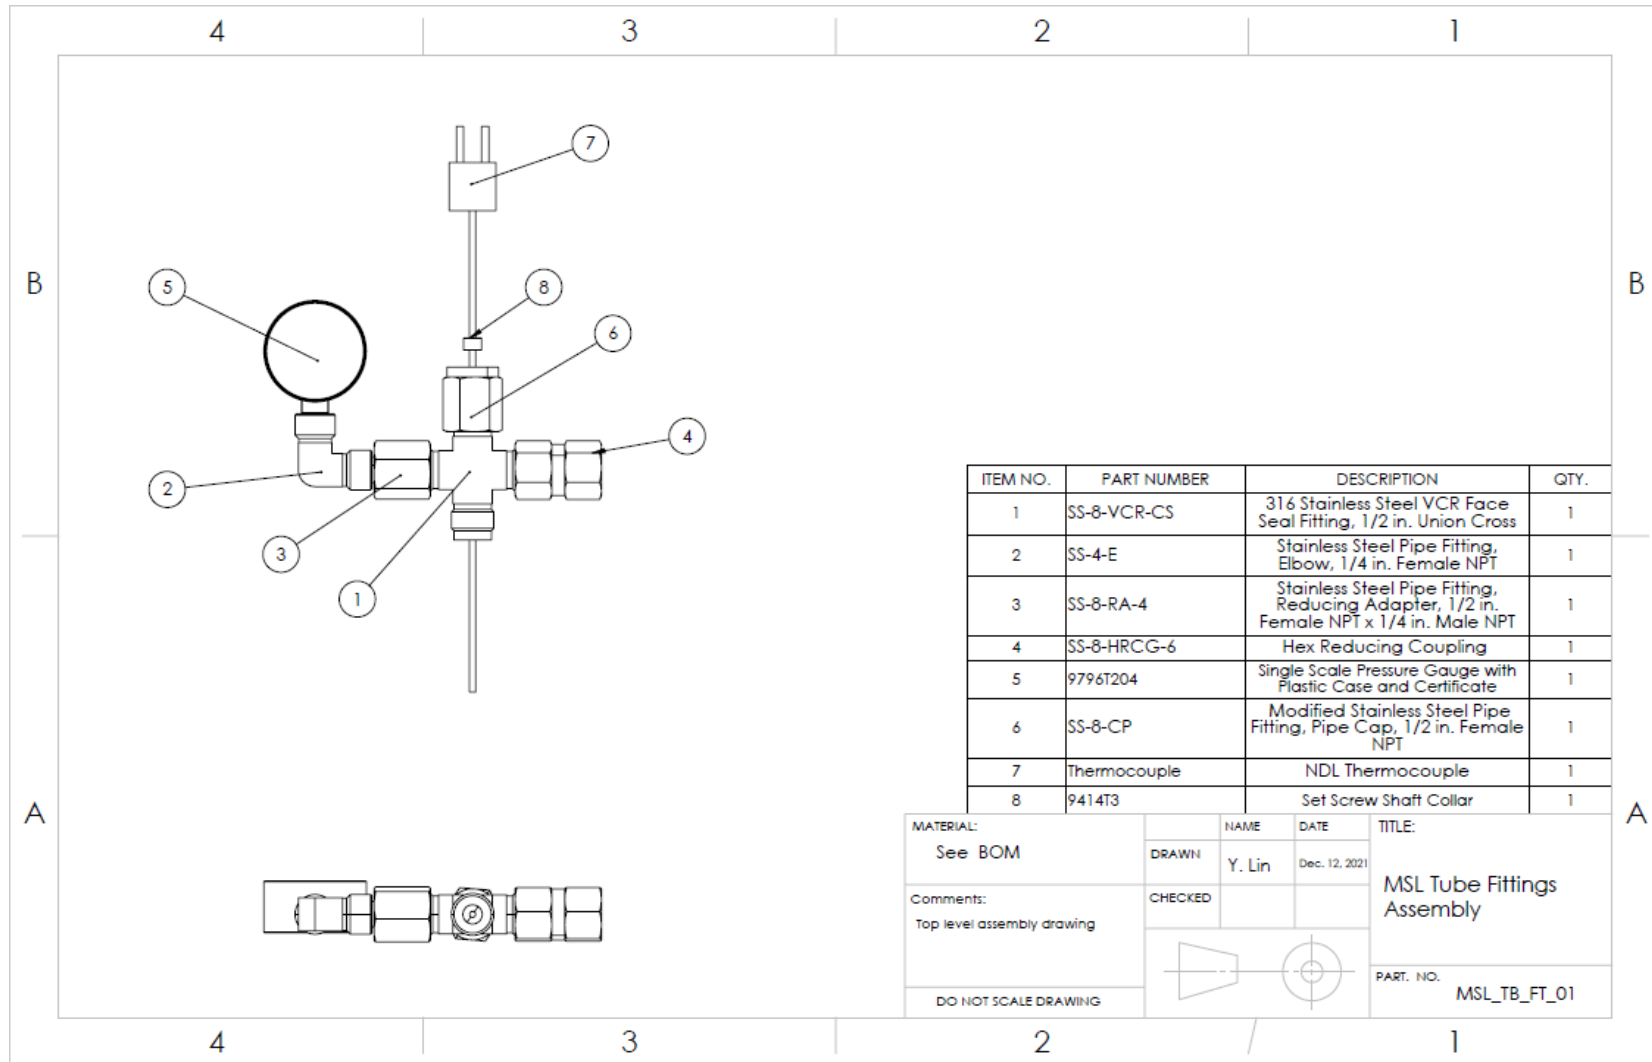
Preliminary Engineering Drawing of the MCMA Assembly.
